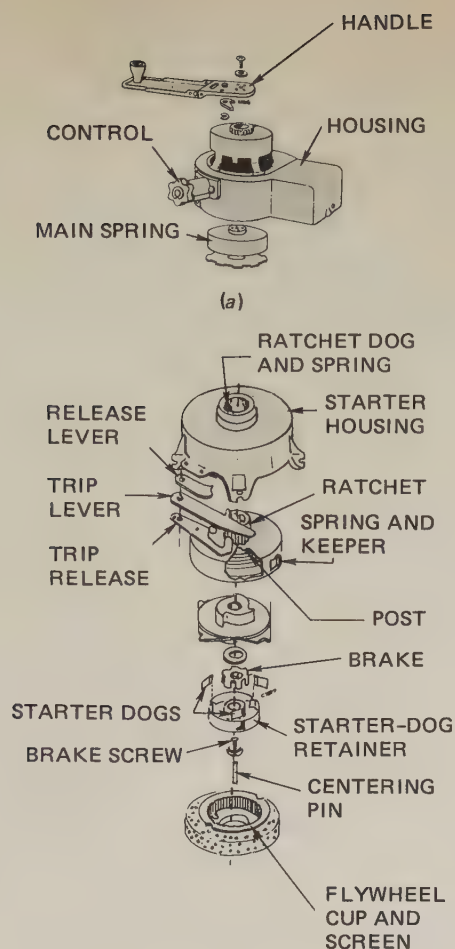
Assembled and disassembled views of windup starters. In (a), the type shown must be disassembled from the handle end. In (b), the type shown must be disassembled by first removing the drive mechanism.
